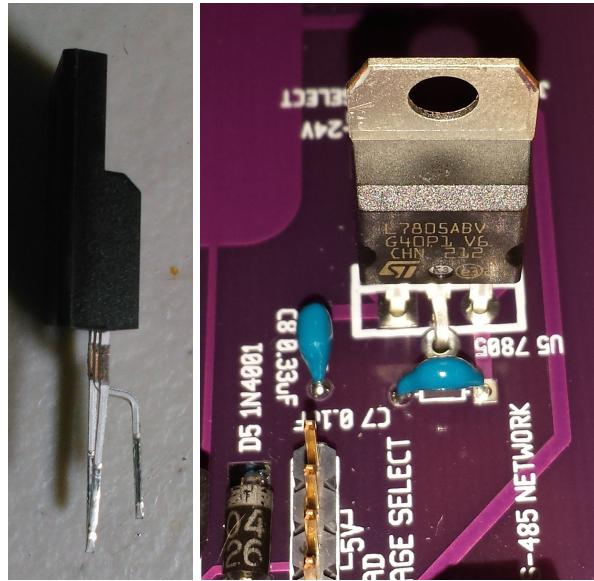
Bending the Pins of the MOSFETs and 7805
